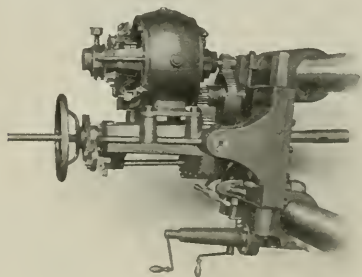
Spindle Driving Mechanism of Dallett Drill.
